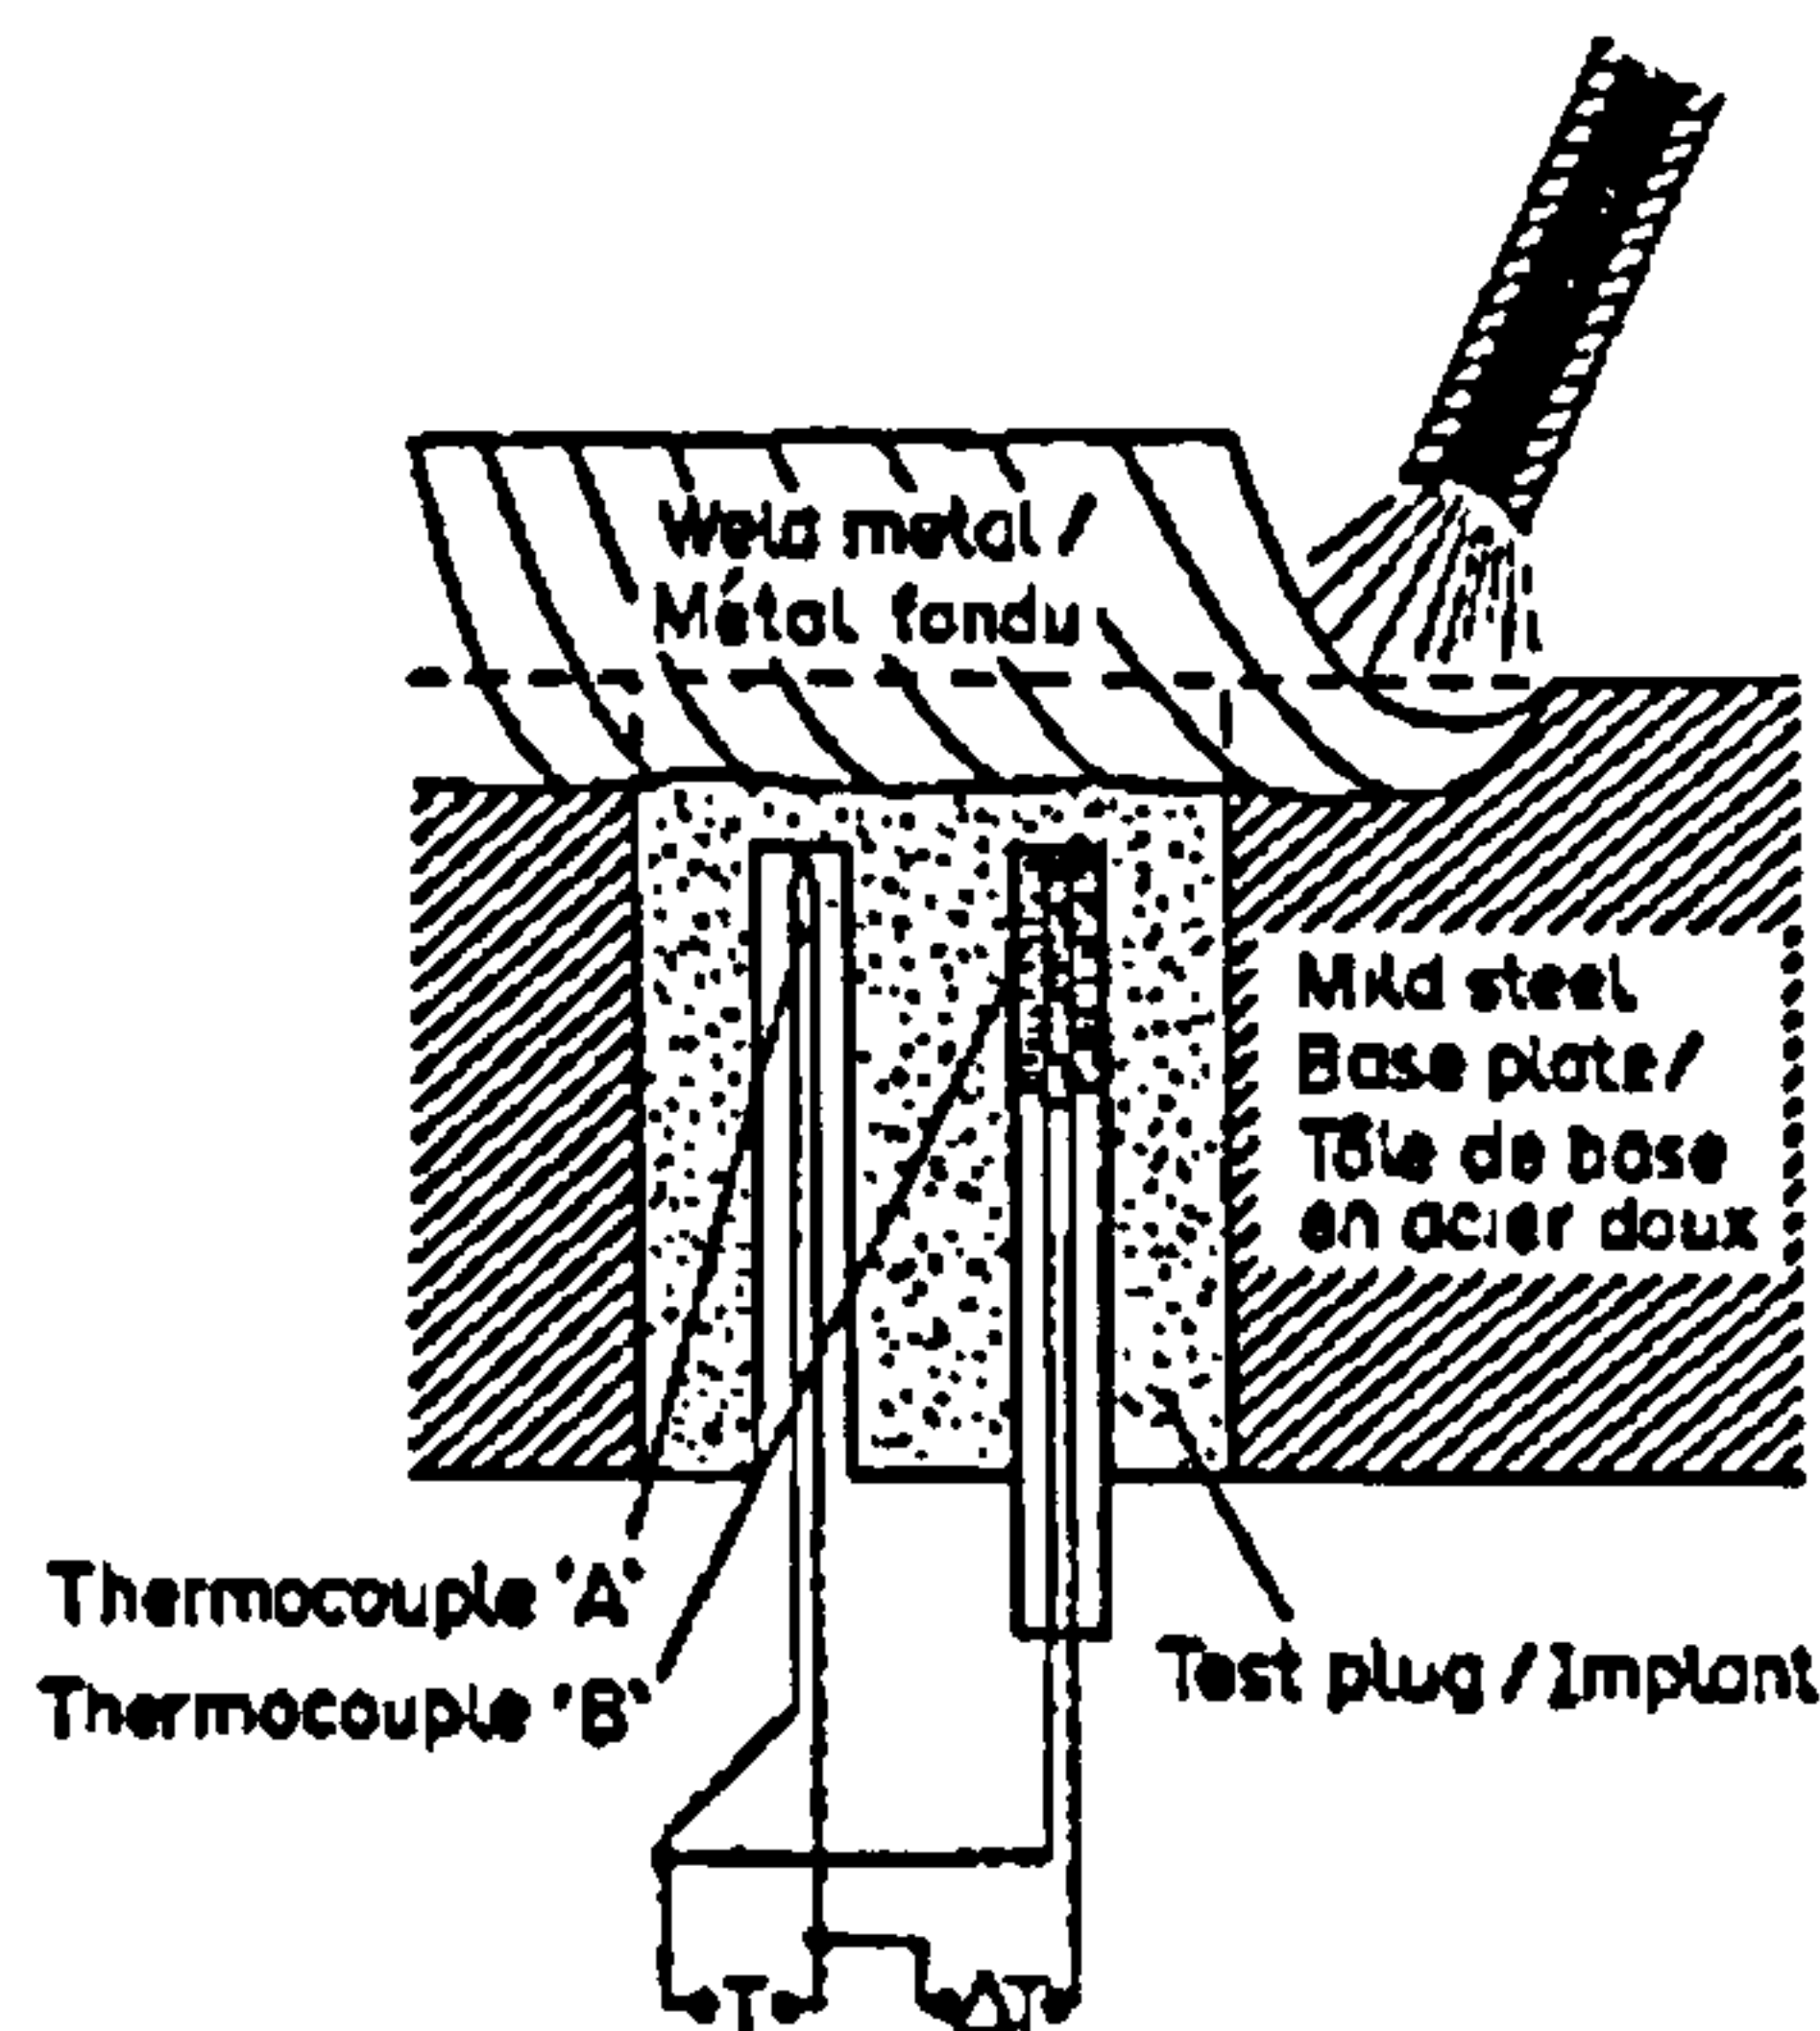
Implant technique for in-situ weld HAZ thermal cycle measurement (after ref. 228)
